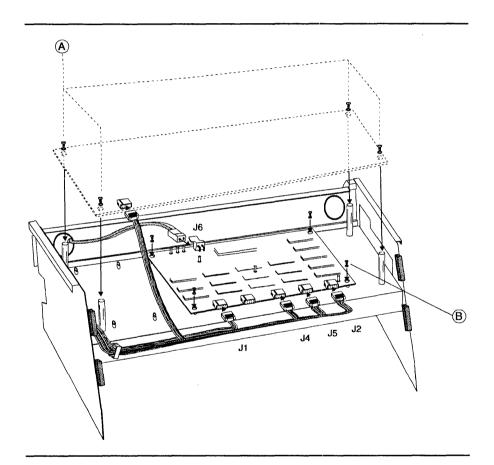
Installing the Upper NPS/IP Board - IS520 Only
